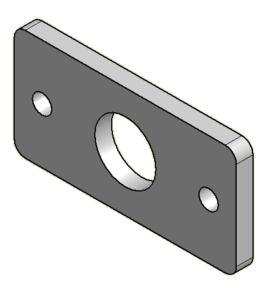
SENSOR MOUNT PANEL 3D MODEL.
